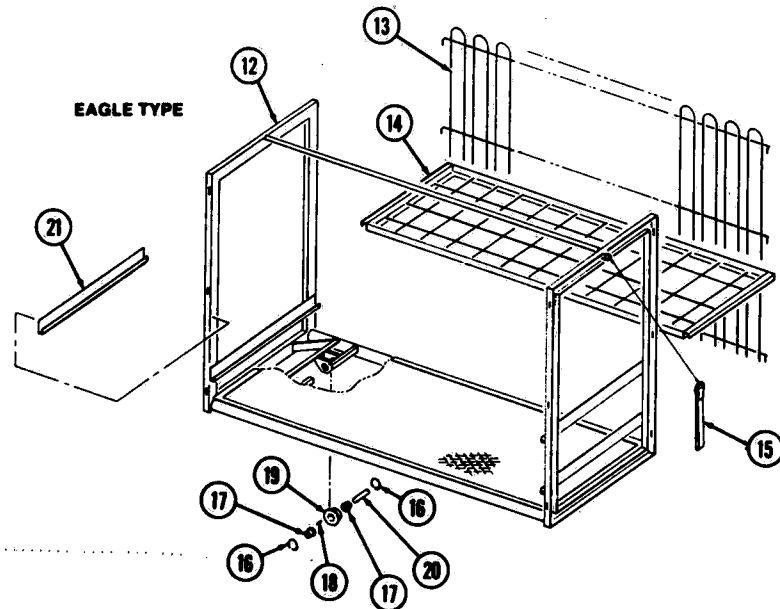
OPTIONAL LOADING CAR ASSEMBLY.
